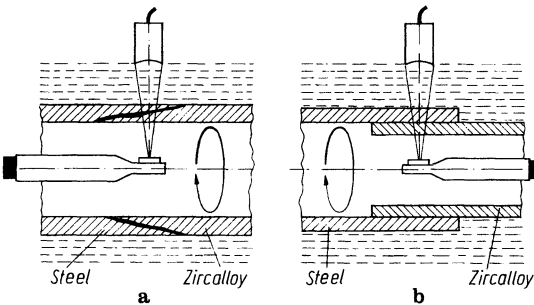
Testing joints between steel and zircalloy pipes. a According to the “flow press method”; or b the explosive-welding method, using the immersion technique and sound transmission, according to Albertini et al
